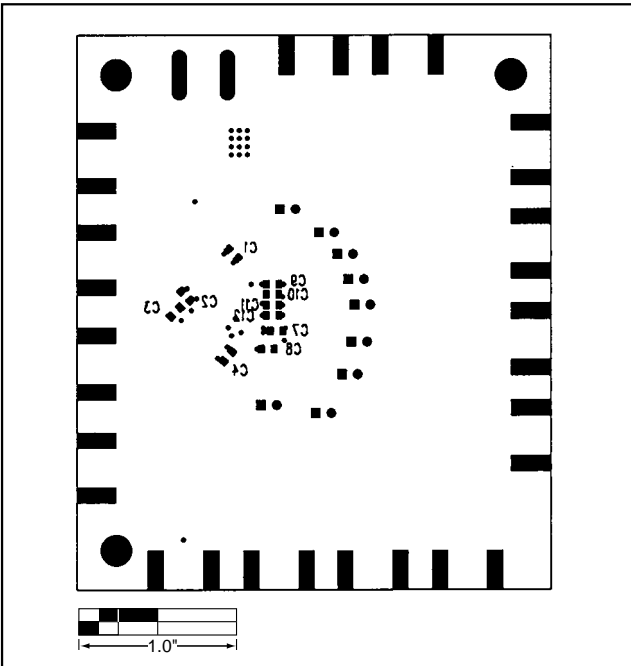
MAX3680 EV Kit PC Board Layout—Bottom Silkscreen
